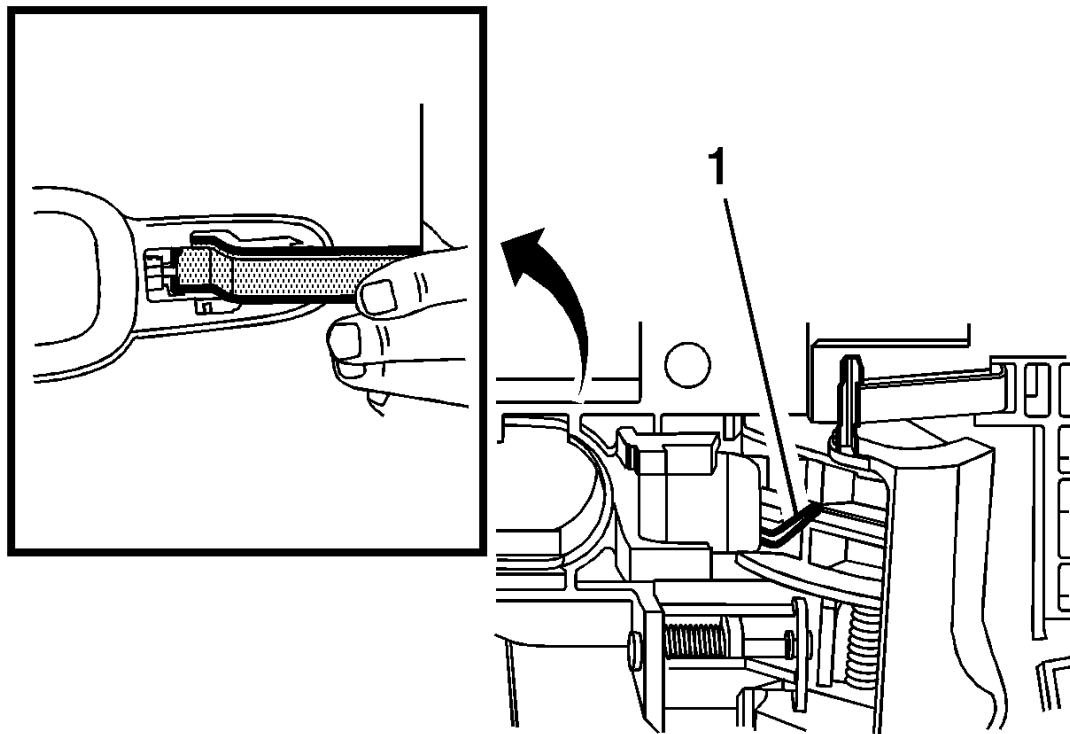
Door Handle Spring Retainer And Hooked Pick Tool
